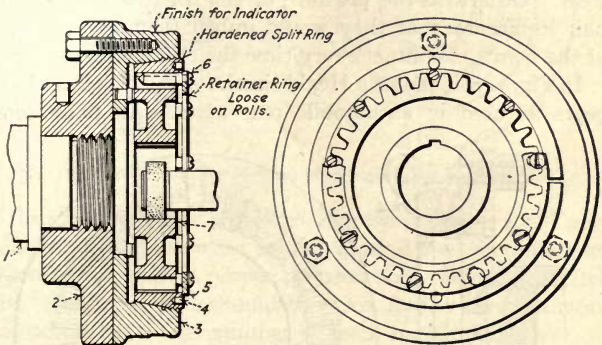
Heald multiple-roll chuck for holding gears for internal grinding.
